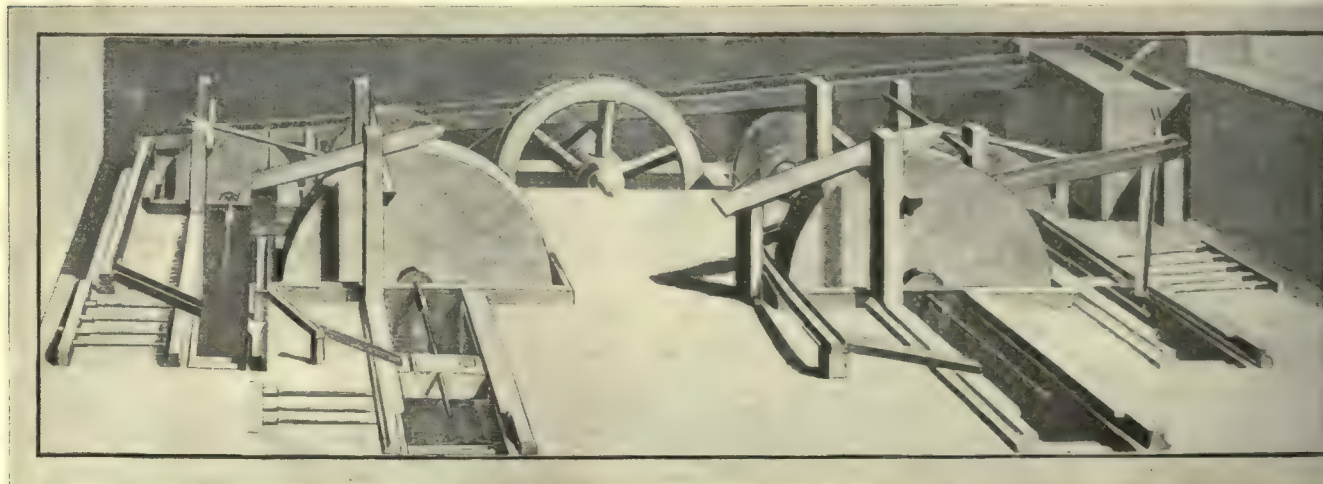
MACHINE FOR BORING GUN BARRELS, 1763
